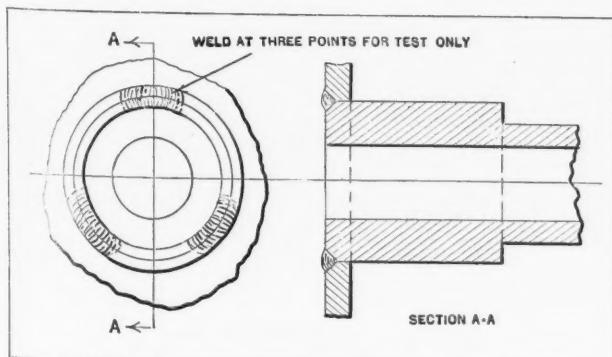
Diagram Showing Method of Welding Rolled Steel Stem to Steel Casting
